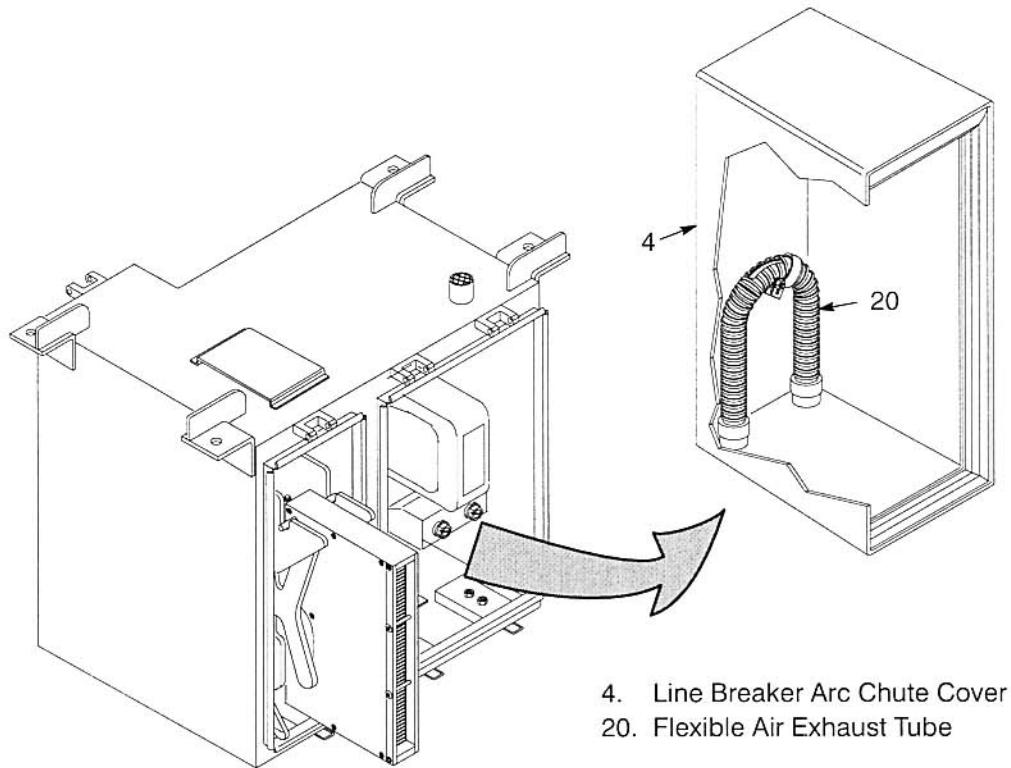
A Inspect/Check Line Breaker Arc Chute Cover
